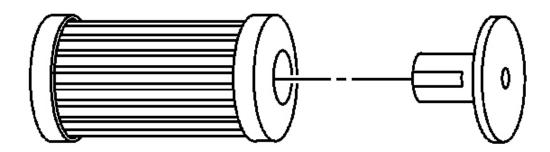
View Of A/C Filter And Check Valve Courtesy of GENERAL MOTORS CORP.
